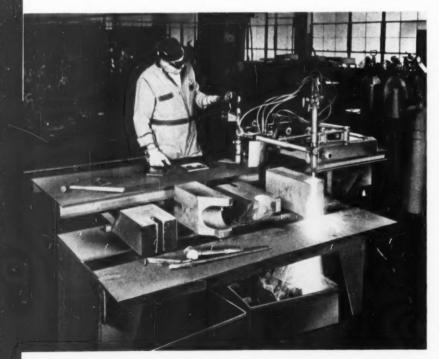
Oxymetylone pantograph machine used for quickly removing excess metal from the brevels block forgings
